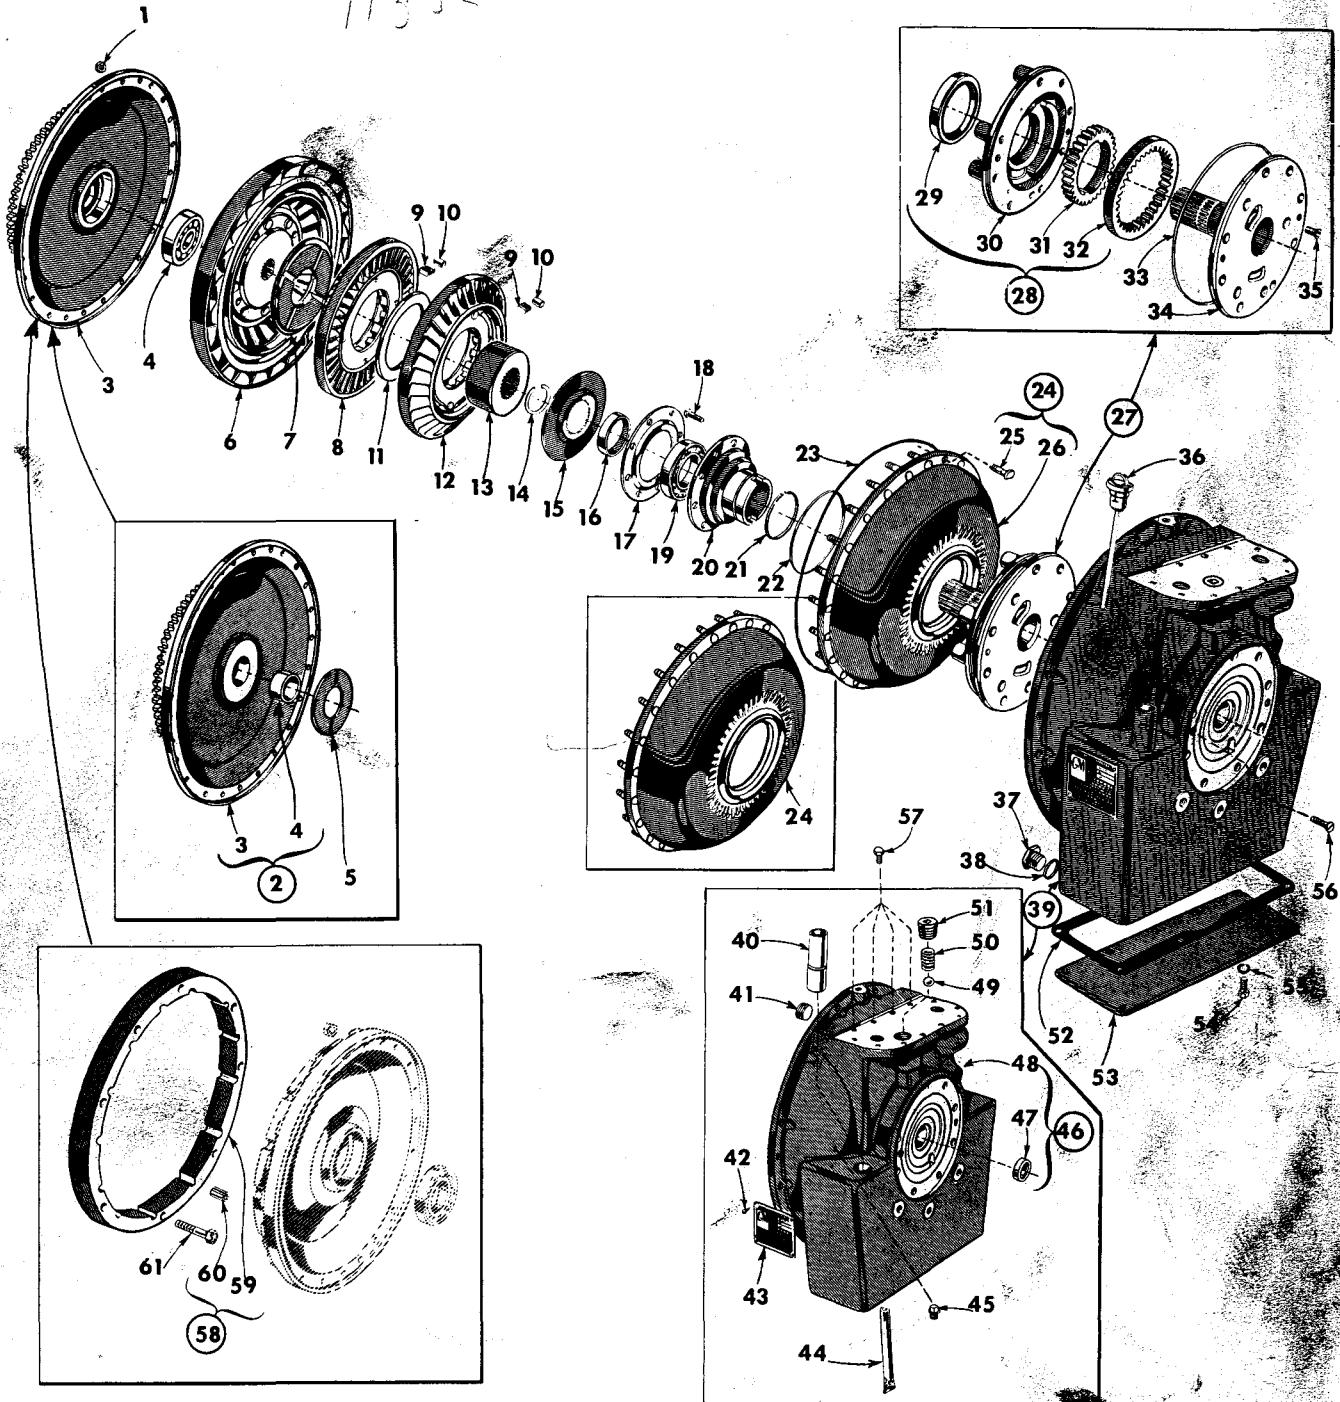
SERIES BASIC TORQMATIC CONVERTER, EXPLODED VIEW
